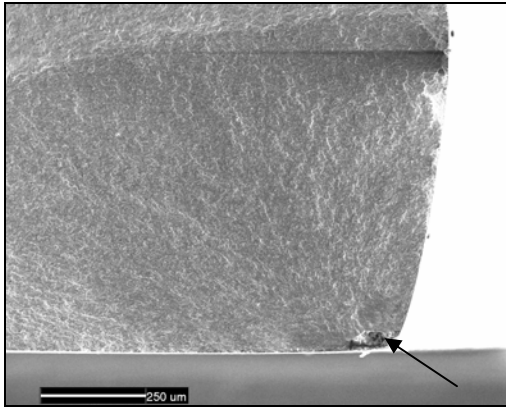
Continental Eagle cryogen – Specimen 7. The surface defect at the initiation point is arrowed (@100X)
